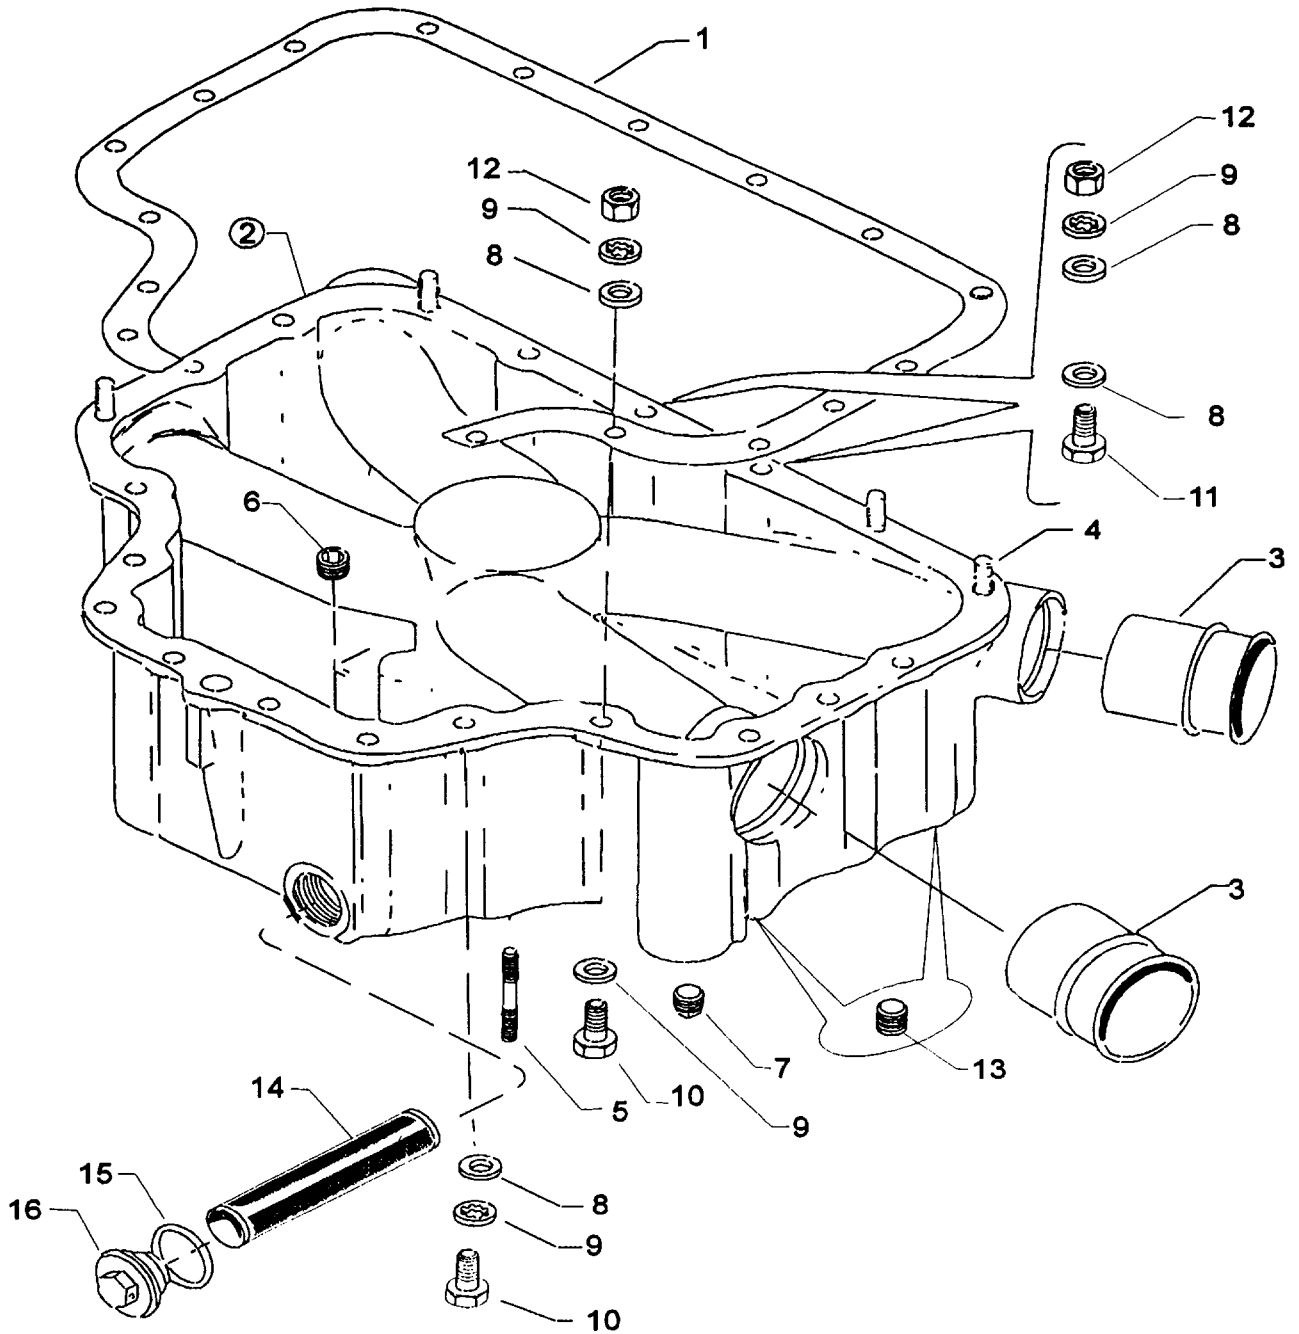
OIL SUMP ASSEMBLY AND OIL SUCTION SCREEN
